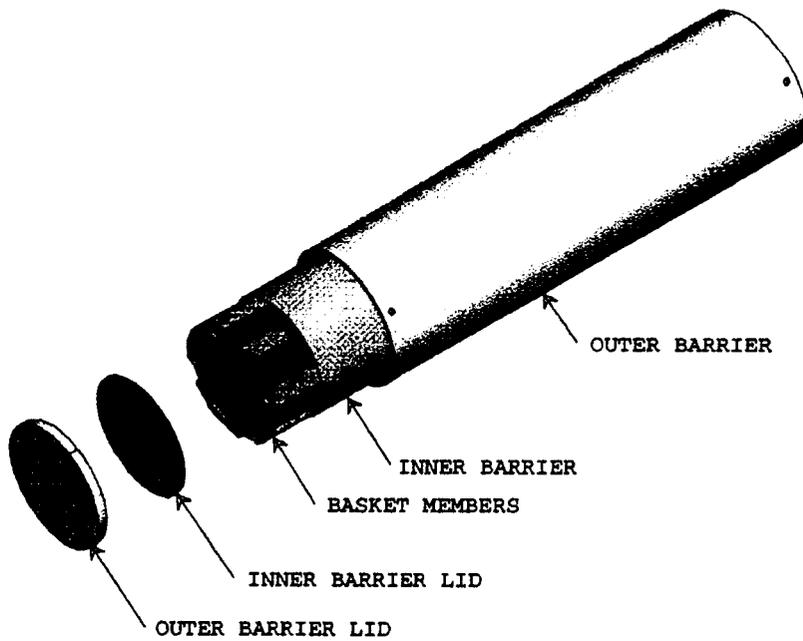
Major components of 21 pressurized water reactor uncanistered fuel assembly waste package
